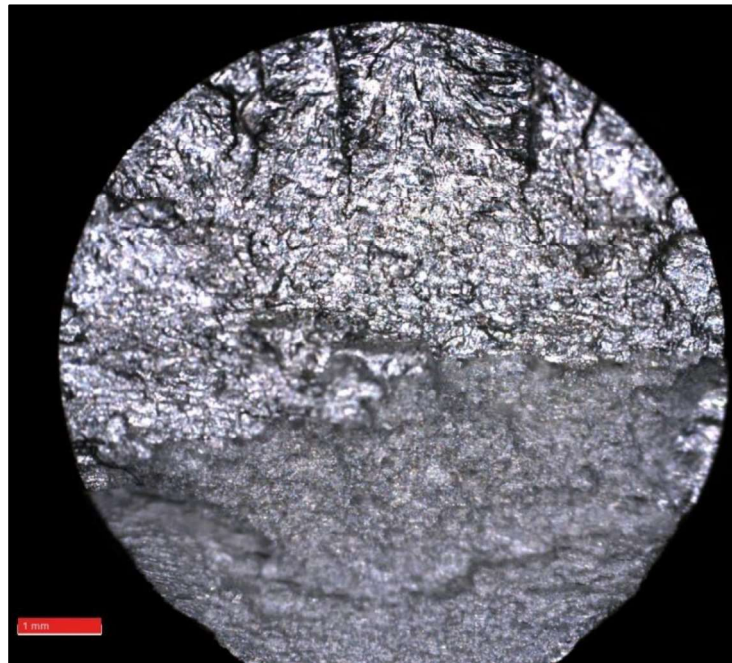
Digital microscope image of CAAT-3 fracture surface
